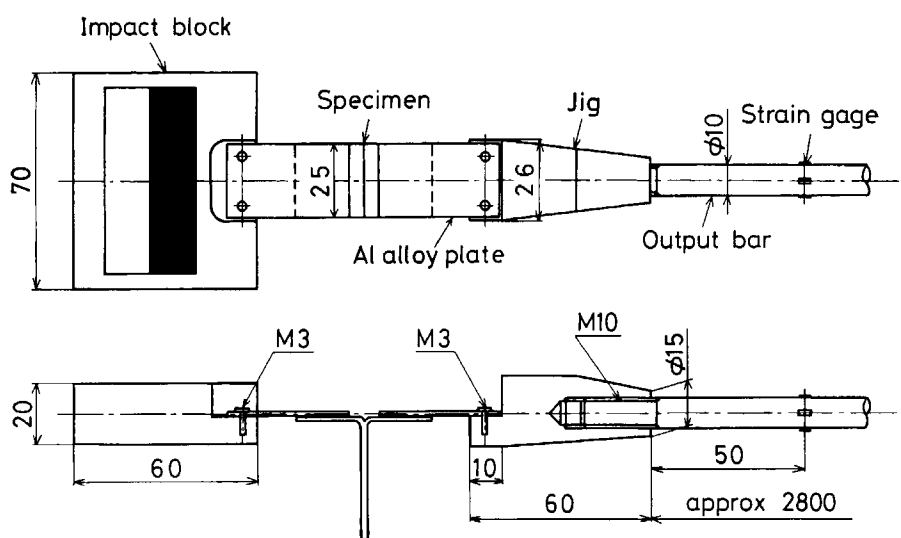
Detail of specimen mounting on dynamic tensile loading machine (for T-peeling specimen).
